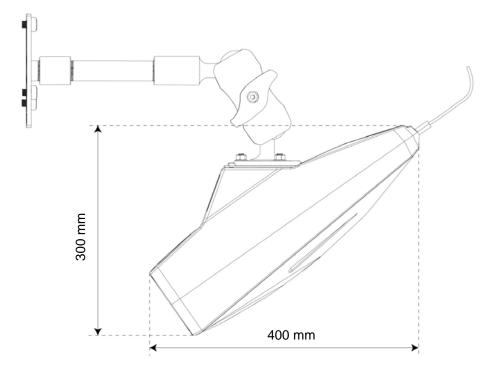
RAVEN-EYE® sensor dimensions side view as installed
